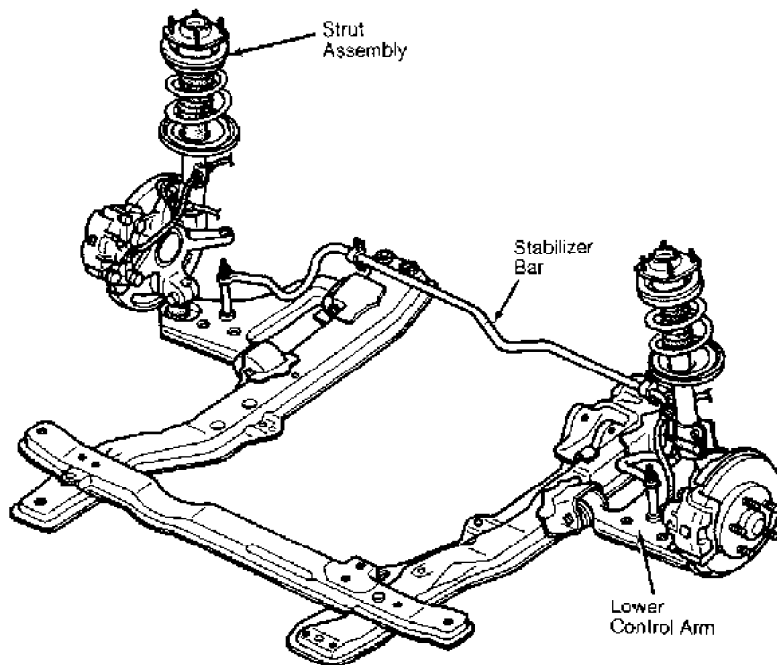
Identifying Front Suspension Components (MX-6 & 626)
